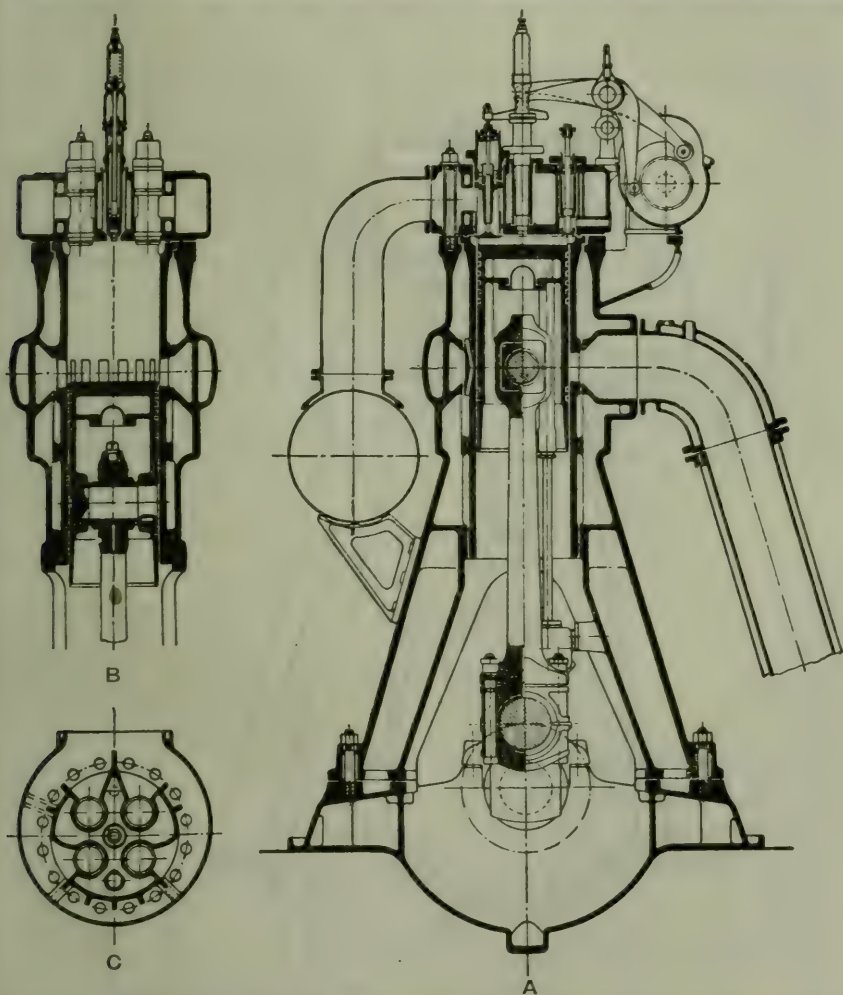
Two-cycle engine with air admission through cylinder head, showing scavenging air valves. Exhaust ports uncovered by piston are shown at A.
